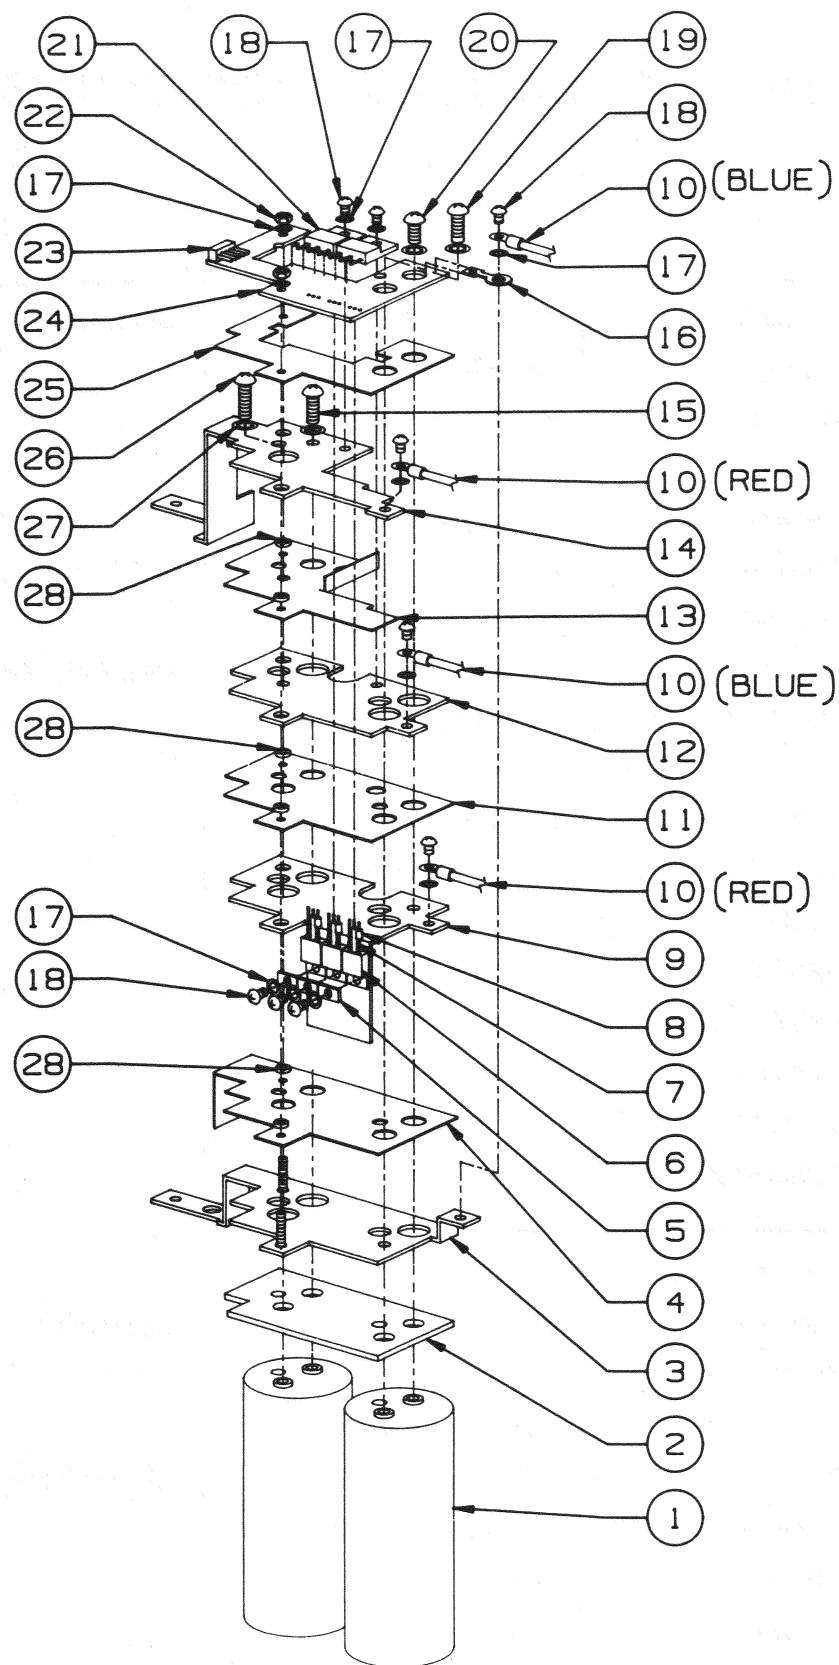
Channel 2 Bi-Level Switch Assembly
